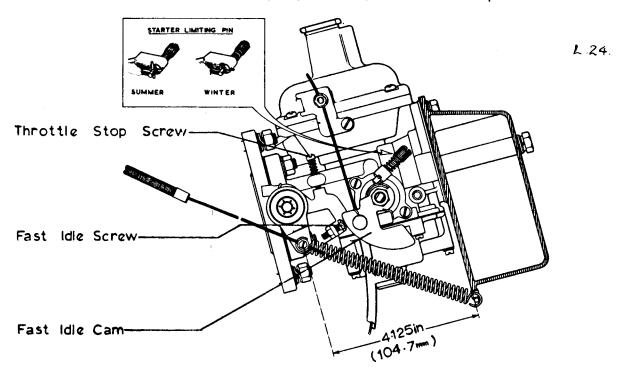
ADJUSTING SCREWS & THROTTLE LEVER SETTING.
